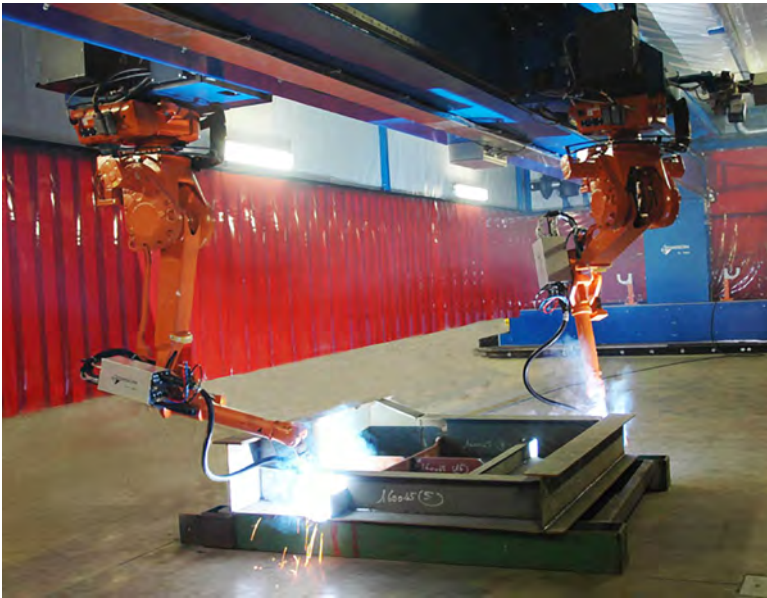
Robotic welding of stiffeners incorporating force-feedback control
